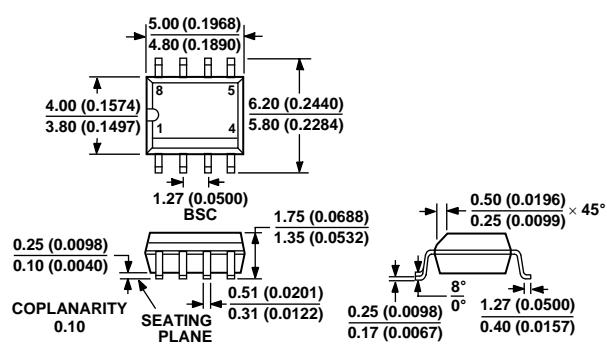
8-Lead Standard Small Outline Package [SOIC\_N]
